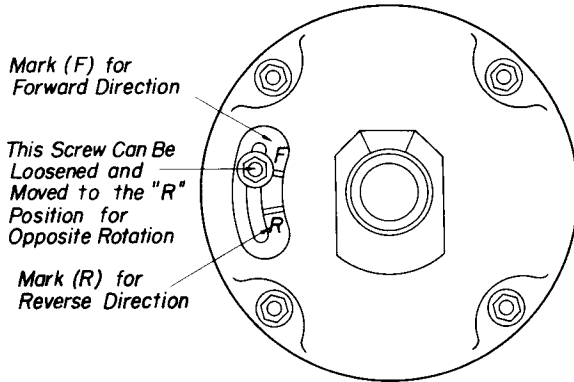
An end plate showing how the brush holder is moved to reverse the motor.
